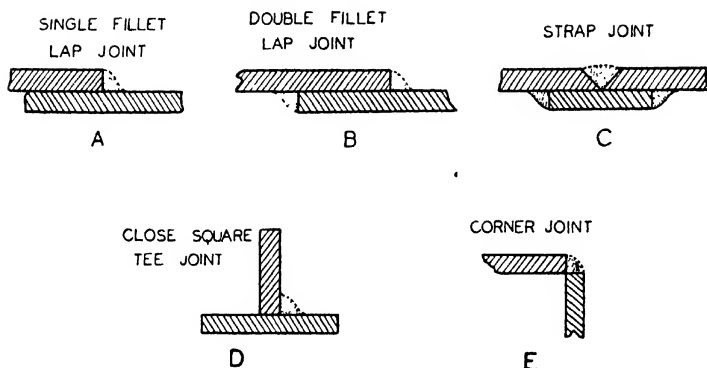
EXAMPLES OF FILLET WELDS
